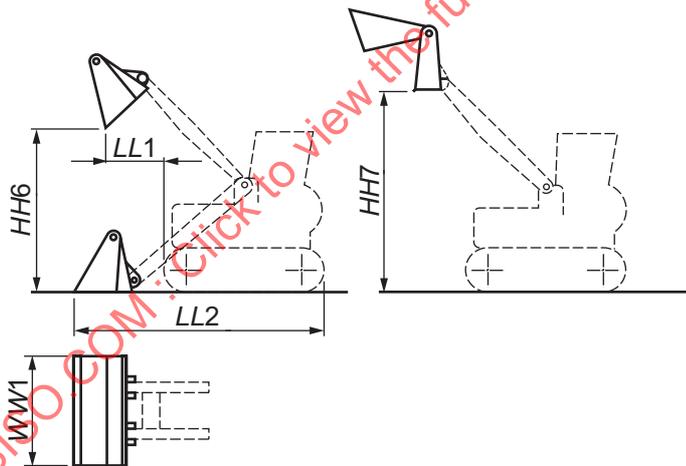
Dimensions of equipment and multi-purpose bucket installed on loaders
